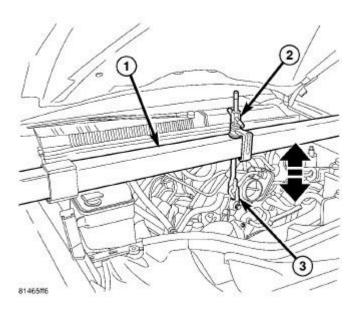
ENGINE SUPPORT TOOL Courtesy of CHRYSLER LLC
